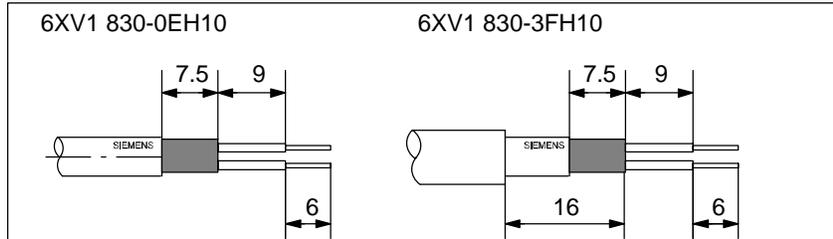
Cable Stripped for Connection to Bus Connector (6ES7 972-0B.11 ...)
